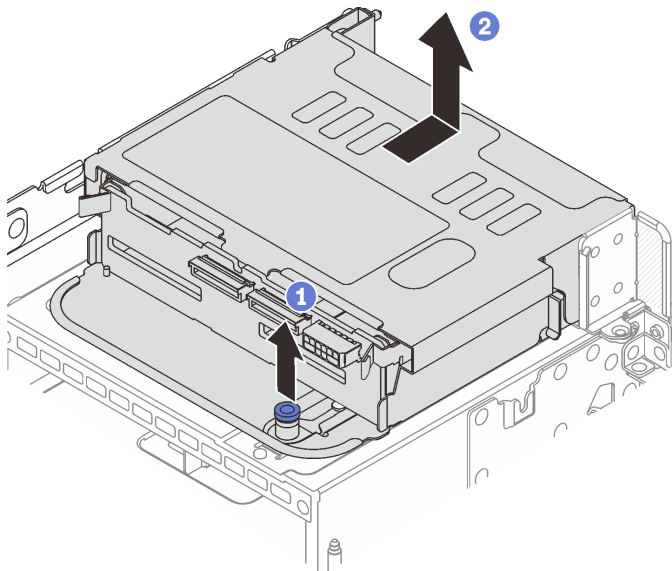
Removing the 4 x 2.5-inch rear drive cage
